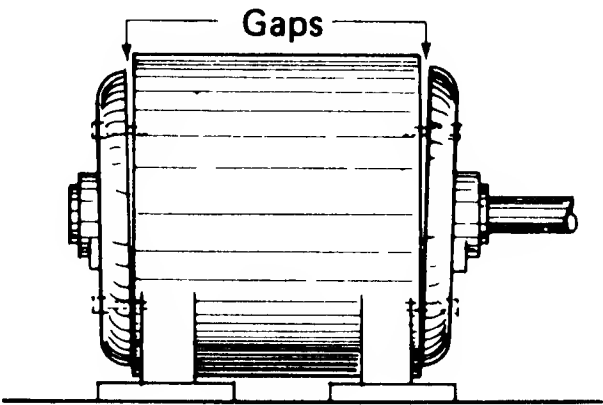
A worn bearing may cause the rotor to rub on the stator core.
